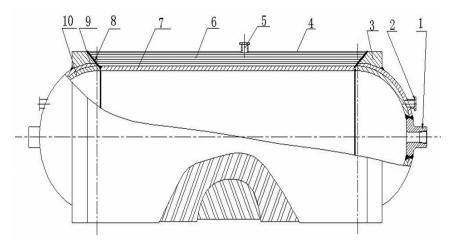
Construction of multifunctional layered stationary high-pressure hydrogen storage vessel. 1 – End nozzle; 2 – Head nozzle; 3 – Reinforcing ring; 4 – Protective shell; 5 – Cylinder nozzle; 6 – Flat steel ribbon wound cylindrical shell; 7 – Inner shell; 8 – Slant weld; 9 – Outer hemispherical head; 10 – Inner hemispherical head.
